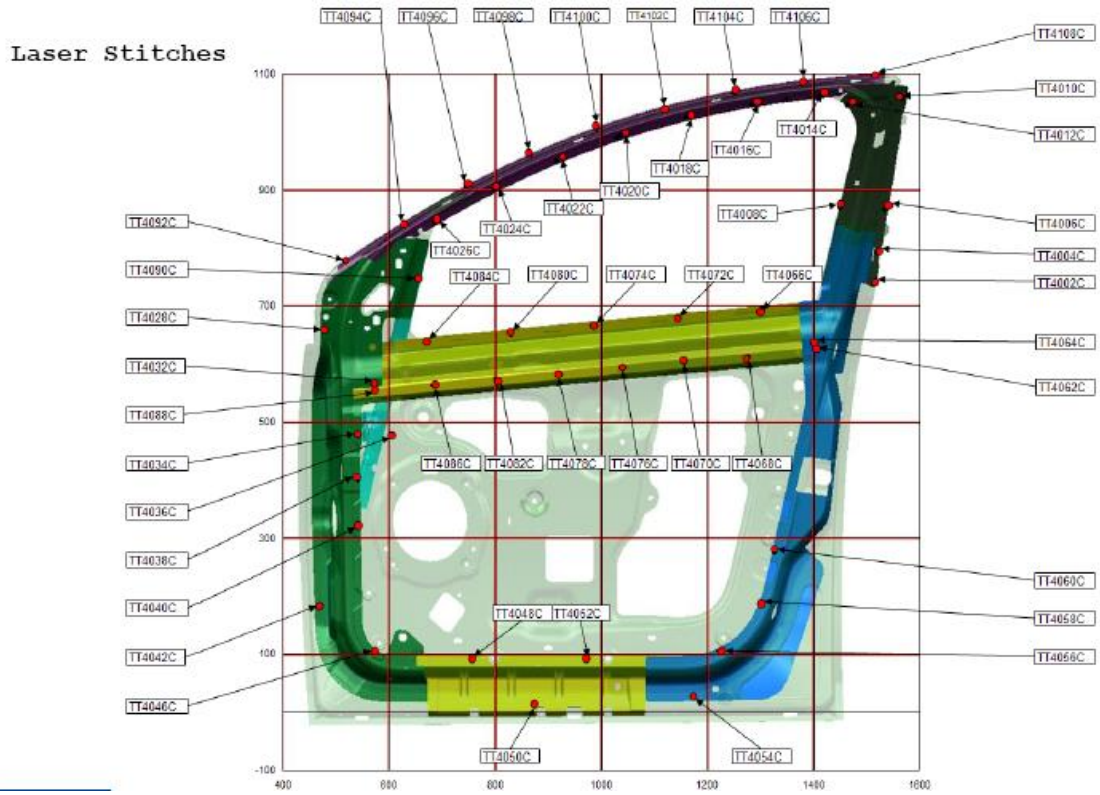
Welding stitches between inner frame and all reinforces
